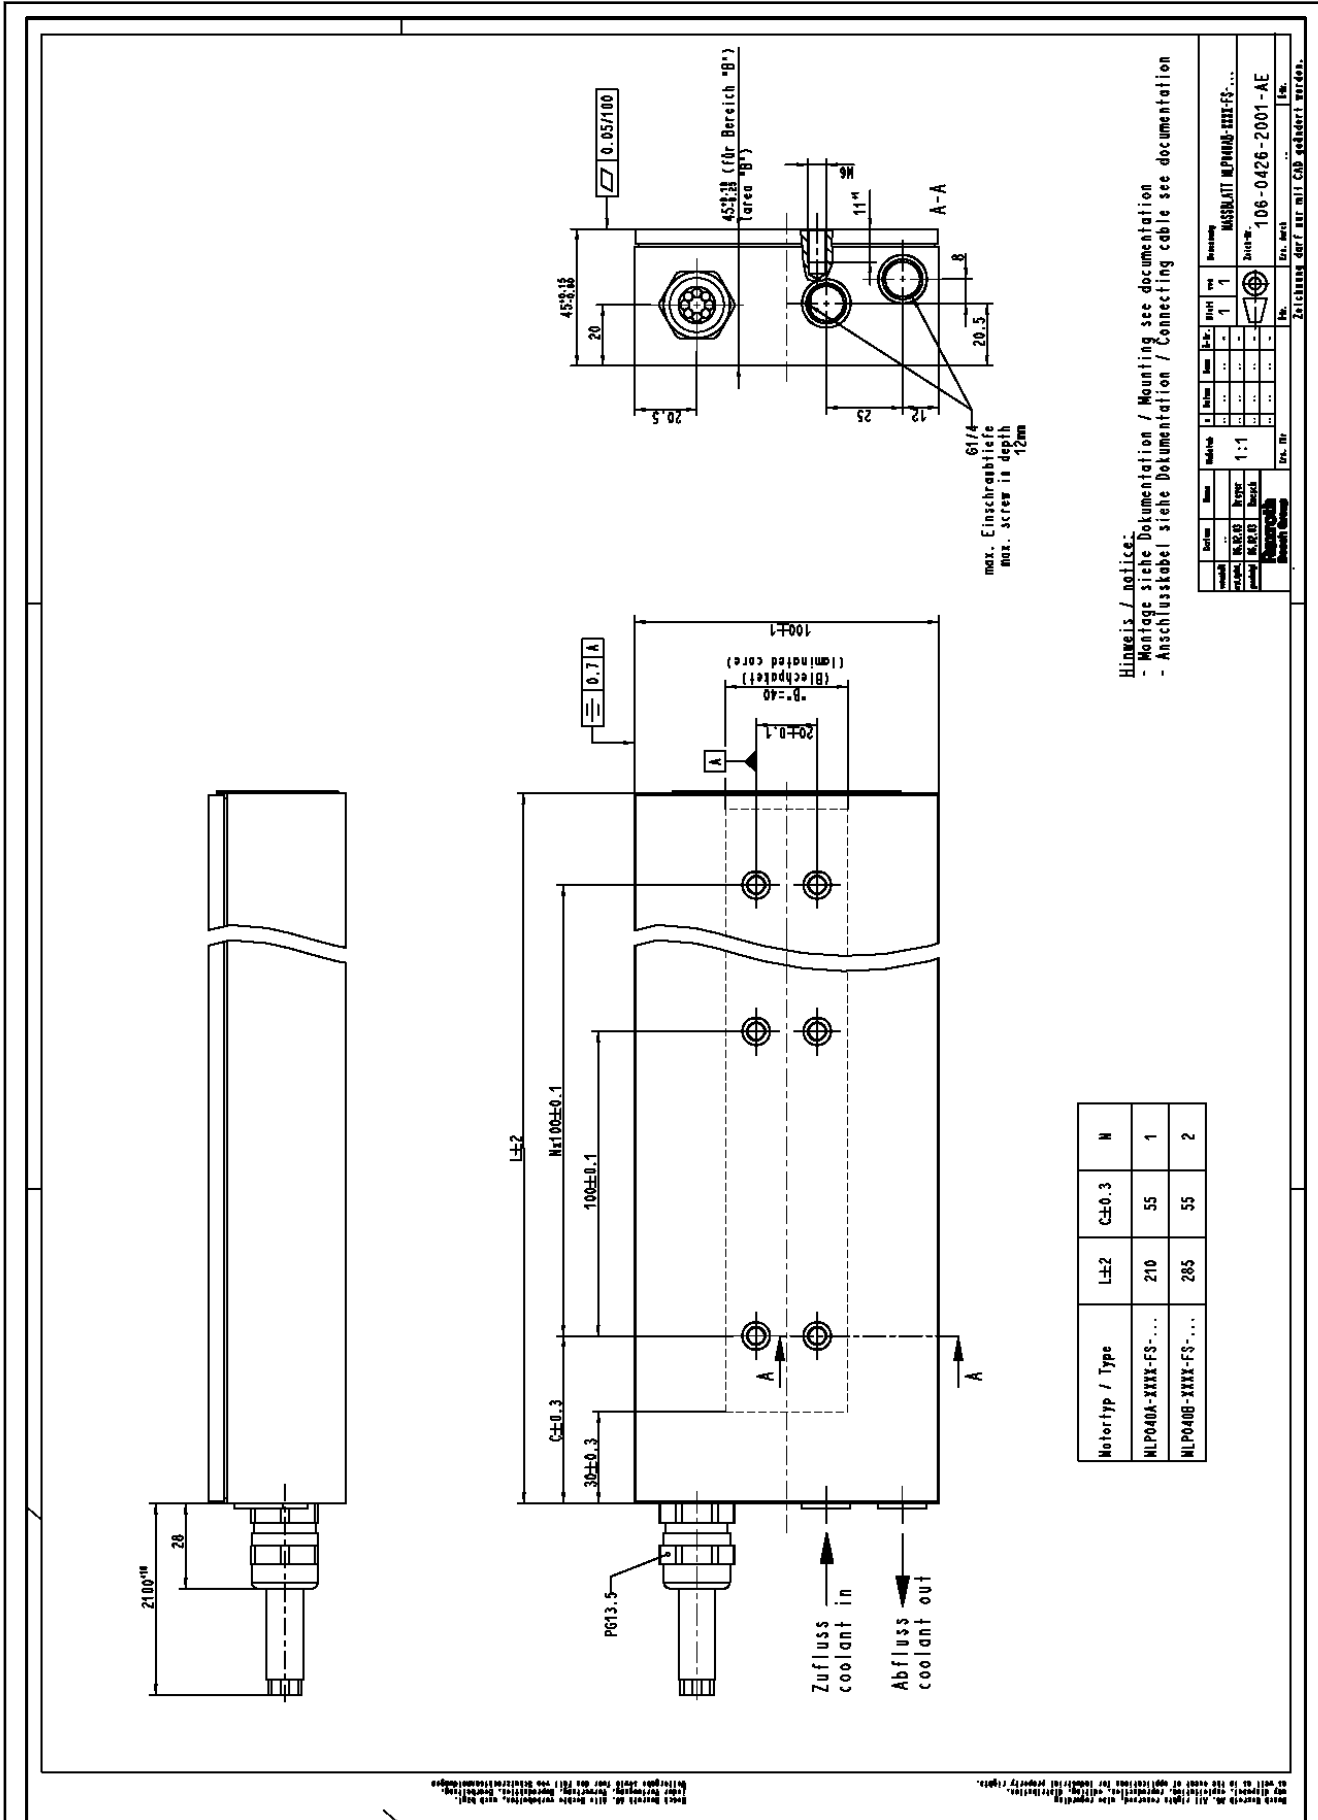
Parallelism and symmetry between the fastening holes for the primary part and the fastening threads for the secondary part
